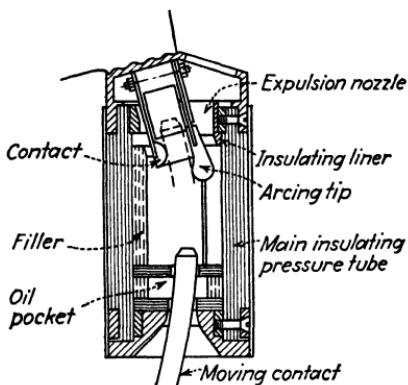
Explosion oil circuit-breaker chamber. (*Schwager.*)
